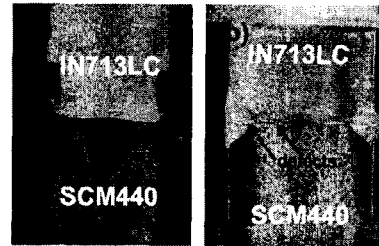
Cross section shape of welded metals (a) Friction welding (b) laser welding
